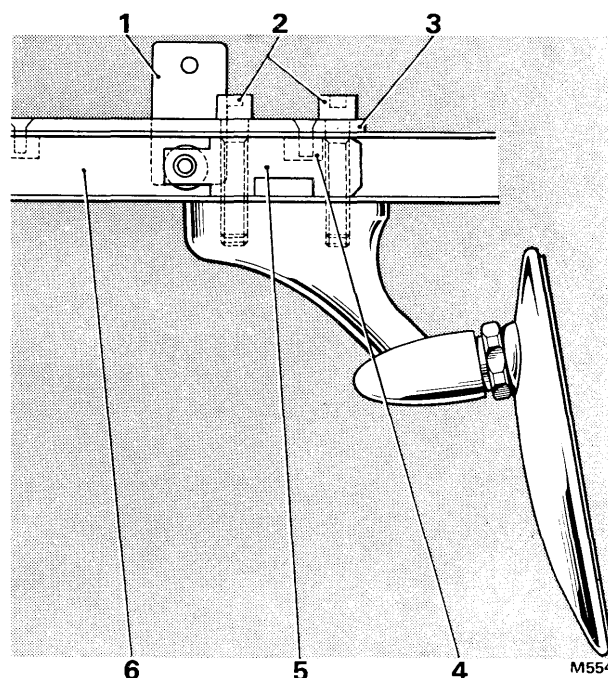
METHOD OF FITTING A FIXED DRIVING MIRROR TO THE FRONT DOOR (Early 4-Door Saloon and Long Wheelbase Cars)
